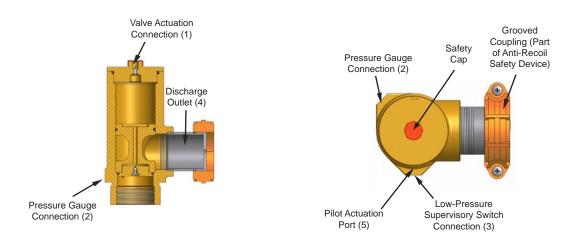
Lv Cylinder Valve Assembly
